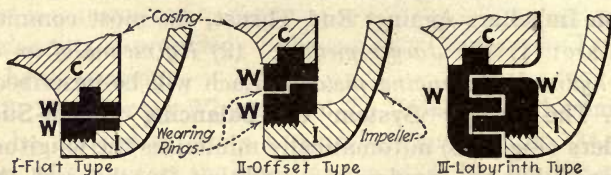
Various Types Of Wearing Rings. (*I* = Impeller, *W* = Wearing Ring, *C* = Casing.)
